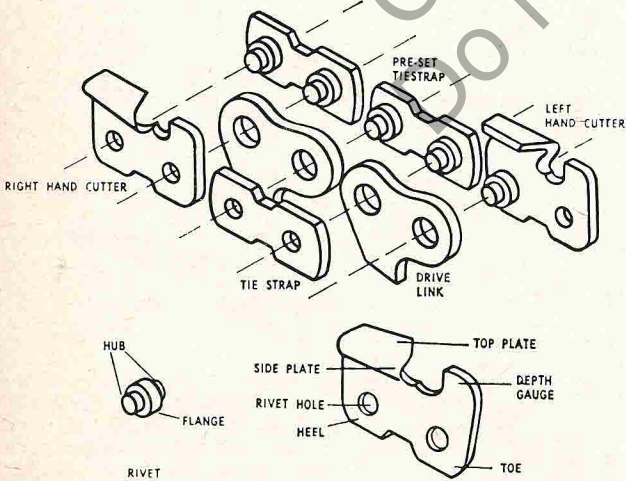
Nomenclature of chipper tooth and chisel tooth saw chains. Chipper tooth is shown; chisel tooth is similar except for cutter design.
